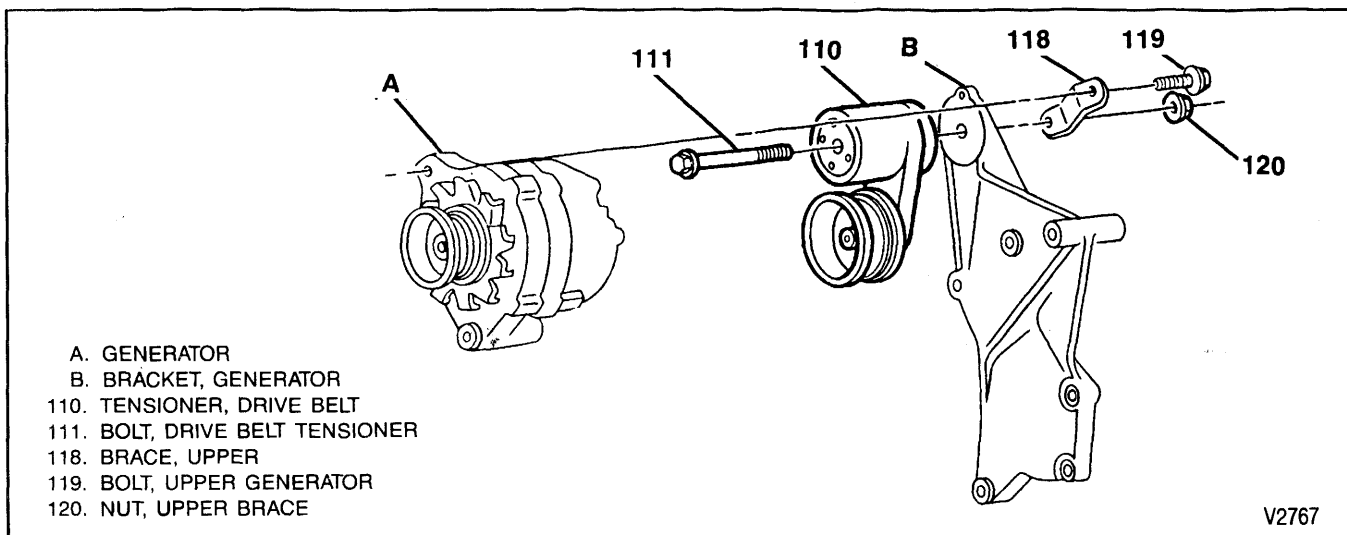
Belt Tensioner Assembly (Diesel Engines)
